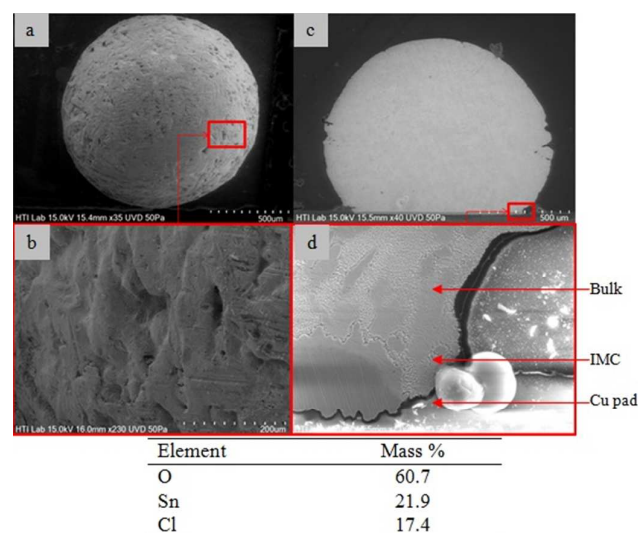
SAC105 after 96 h of salt spray pre-conditioning: (a) surface morphology, (b) magnified surface, (c) cross section view and (d) magnified at joint.
